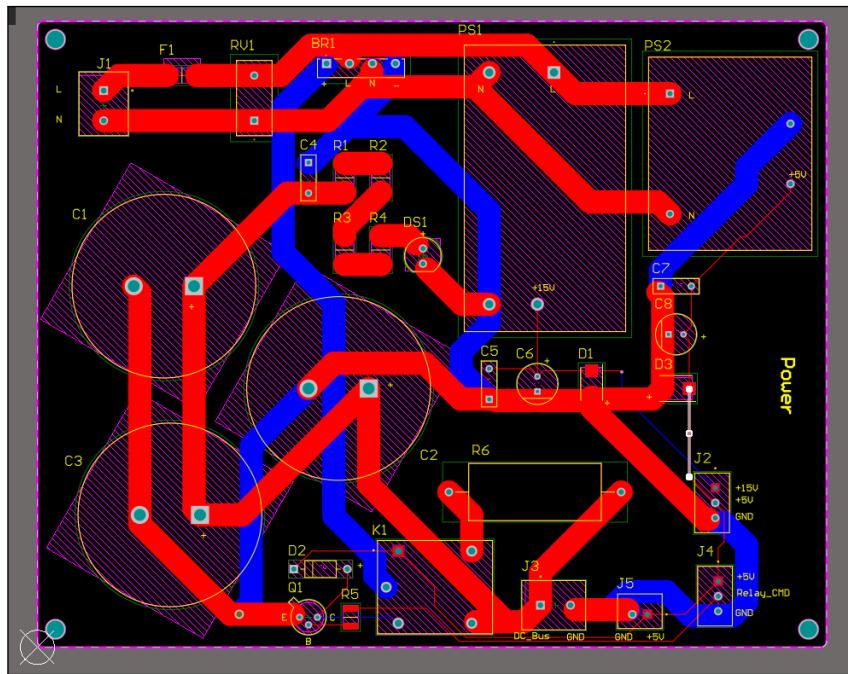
Power Circuit Bottom Layer PCB 2D Layout
